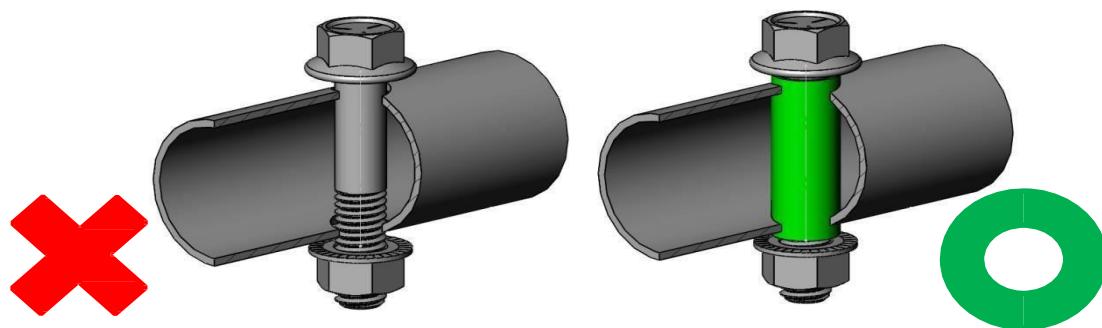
Roll Cage, Required tube sleeve for drilled holes
